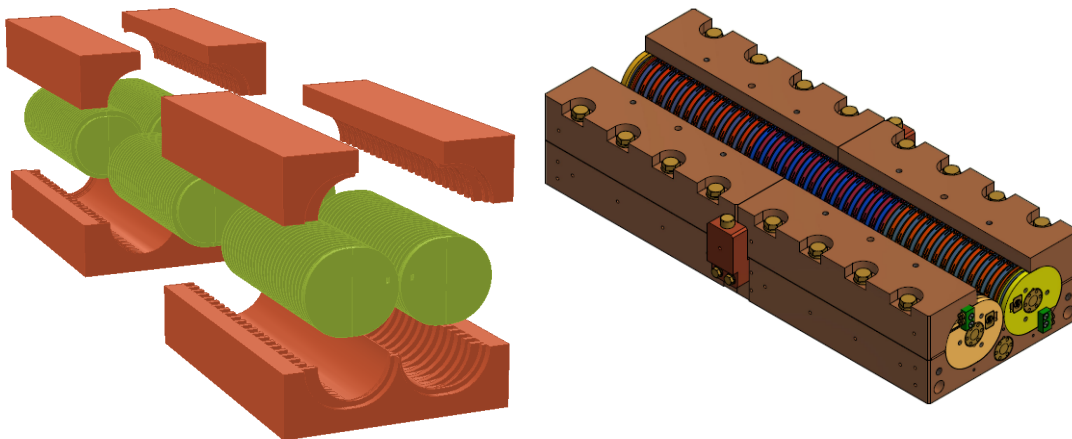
Schematic mechanical layout of the TGU. Exploded View (left): coil former (green) and coil support structure (brown). Undulator coil assembly supported by a bolted clamping structure (right) [61].
